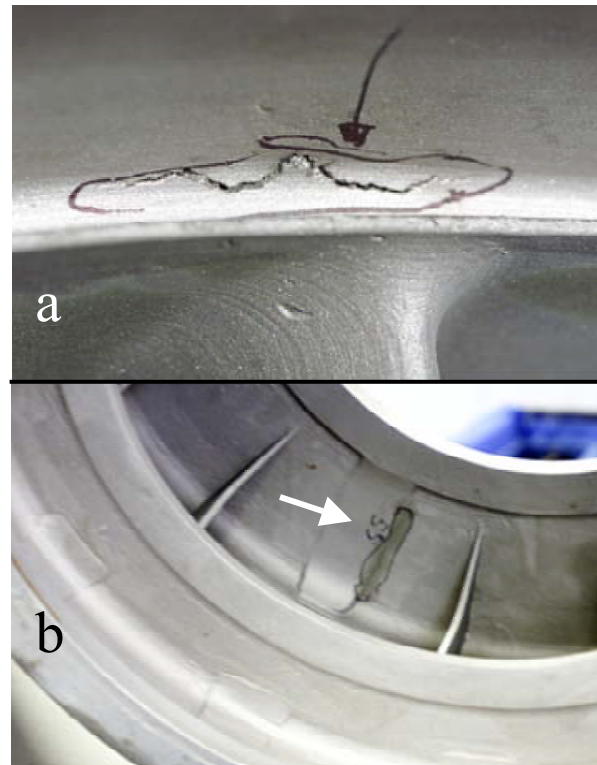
Cracks in demo-casting. a) Crack caused by shrinkage and geometrical constraint at a strut-ring intersection. b) A large crack at the thick-thin junction between a gate (here removed) and the thin front plate.
